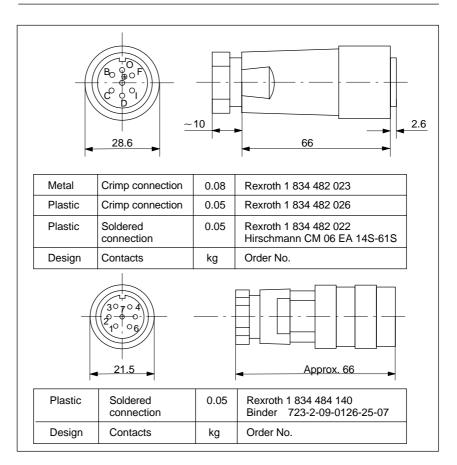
Dimension diagram of circular, 7-pin connector
